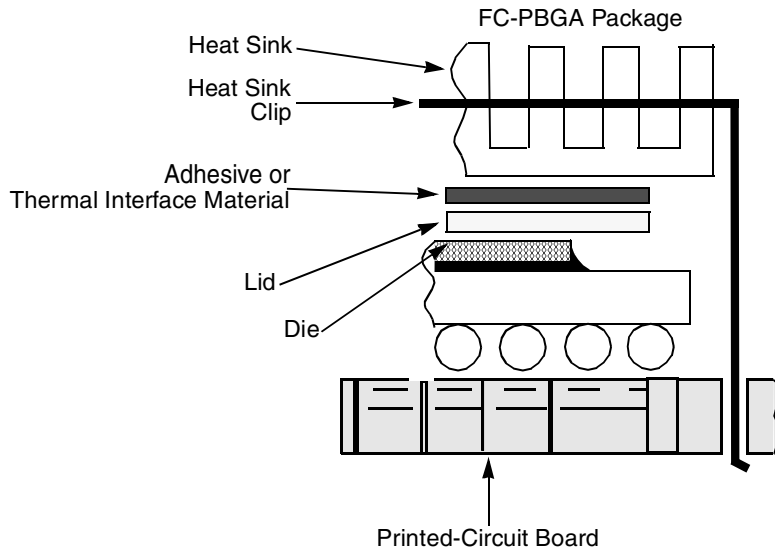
Package Exploded Cross-Sectional View with Several Heat Sink Options
